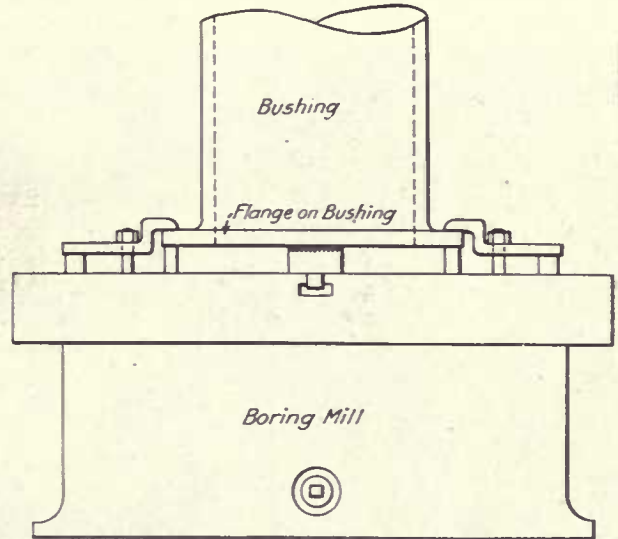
Cylinder Bushing Clamped to Boring Mill Table.
